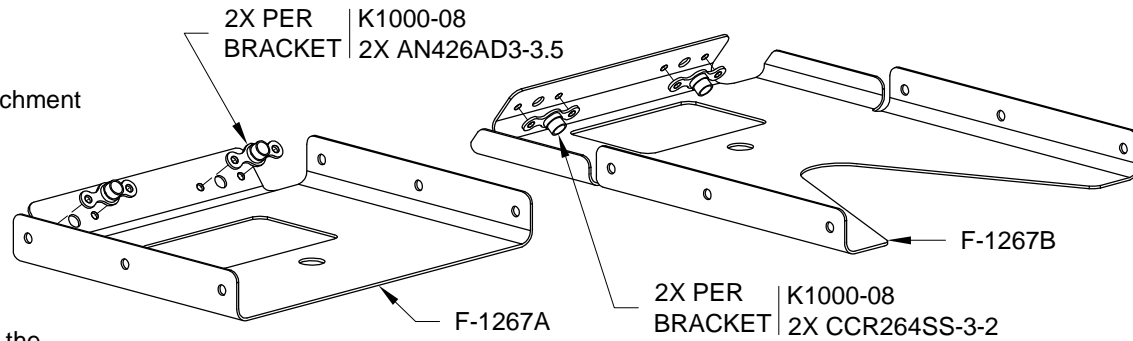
CROTCH STRAP BRACKET NUTPLATES
